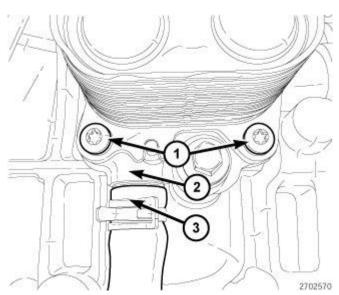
COOLANT HOSE & OIL COOLER HOUSING Courtesy of CHRYSLER LLC
